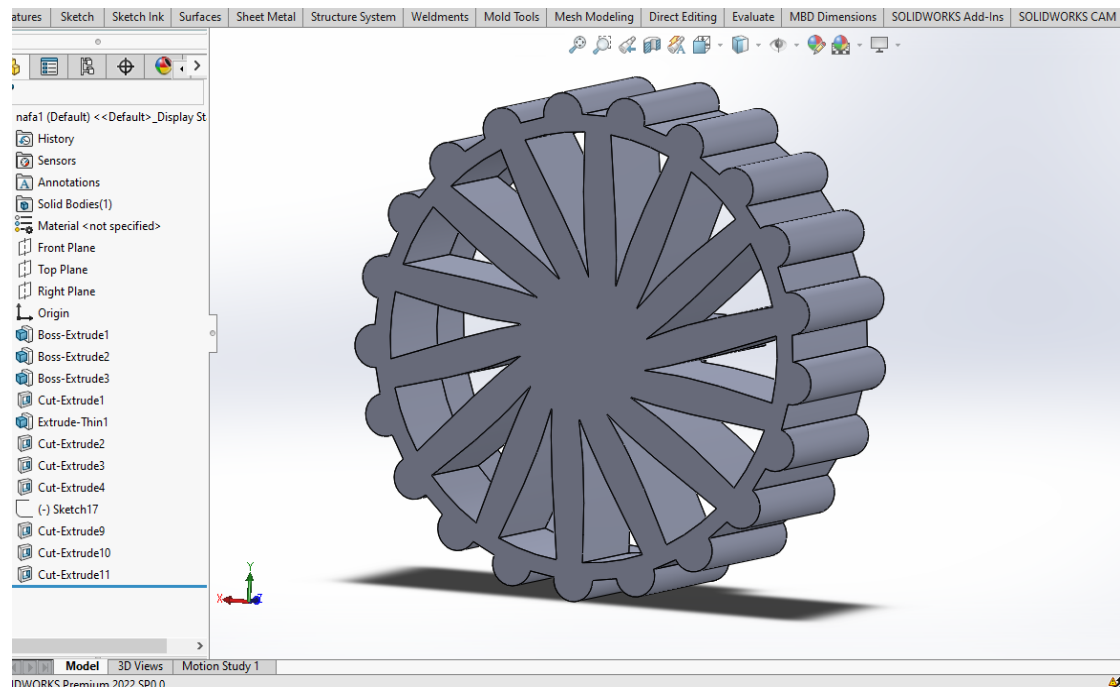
wheel of CleanRayX ‘printed with 3D printer resin’
